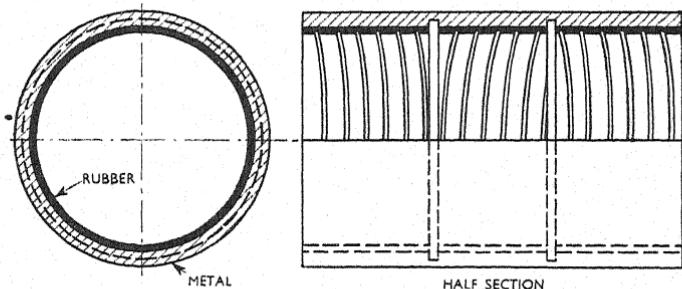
Rubber Bearing with Helical Grooves and Annular Slots
